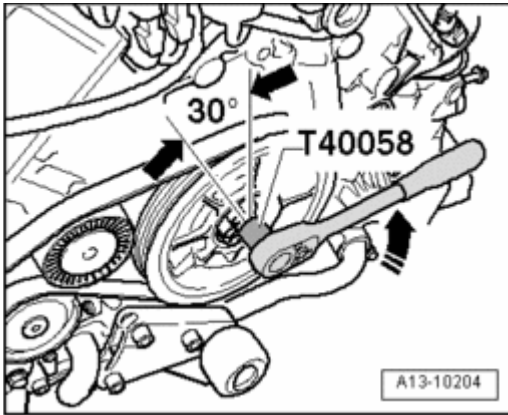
Using Socket T40058 To Rotate Crankshaft In Opposite Direction Of Engine Rotation
